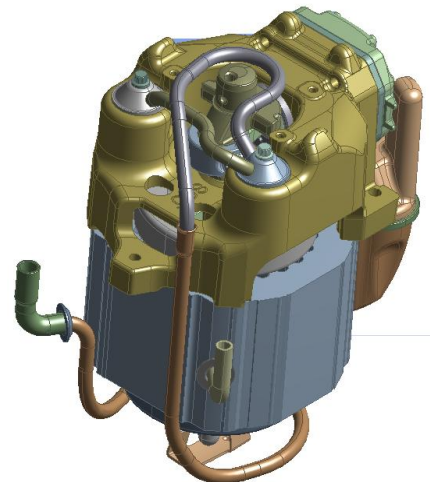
GEOMETRY OF THE COMPLETE COMPRESSOR WITHOUT COVER
